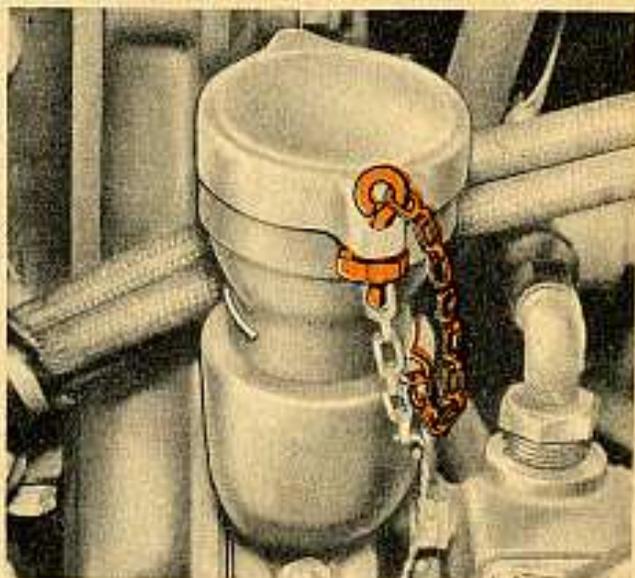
Drill hole in ear of the cap to fit hole of nut, and drop in a steel pin.
